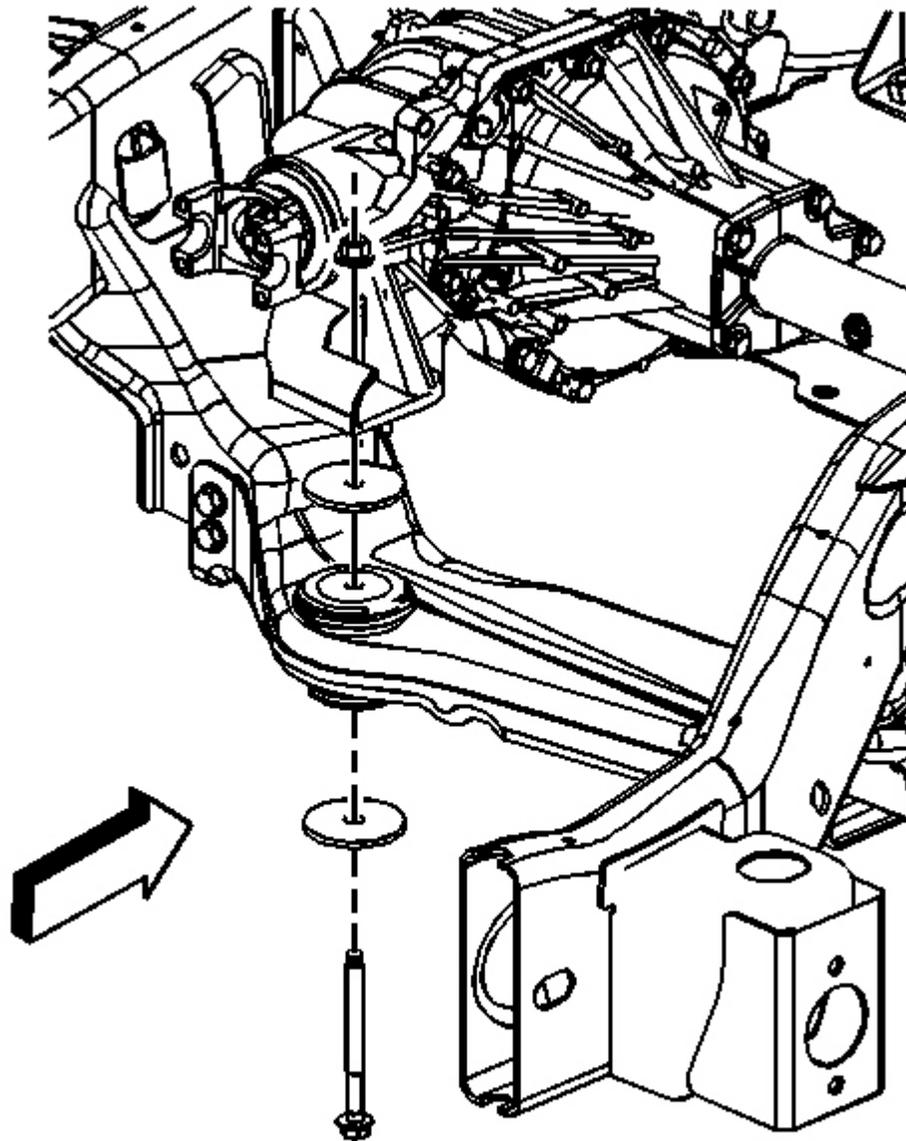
Differential Carrier Assembly Left & Right Side Axle Mount Bolts & Nuts
